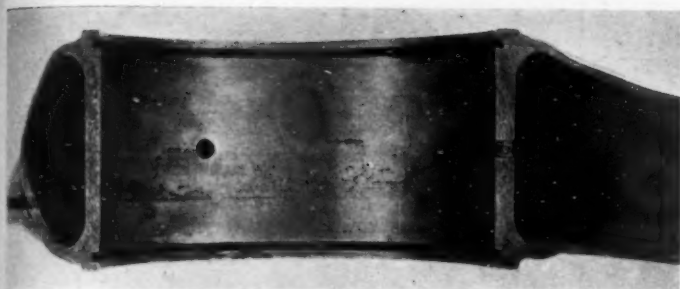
Insert for flexible bearing, Me 210 engine bearer.
